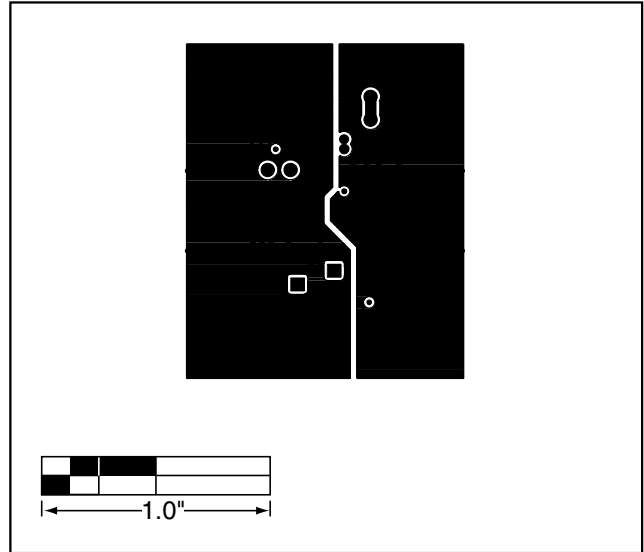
MAX2840 EV Kit PC Board Layout—Layer 3
